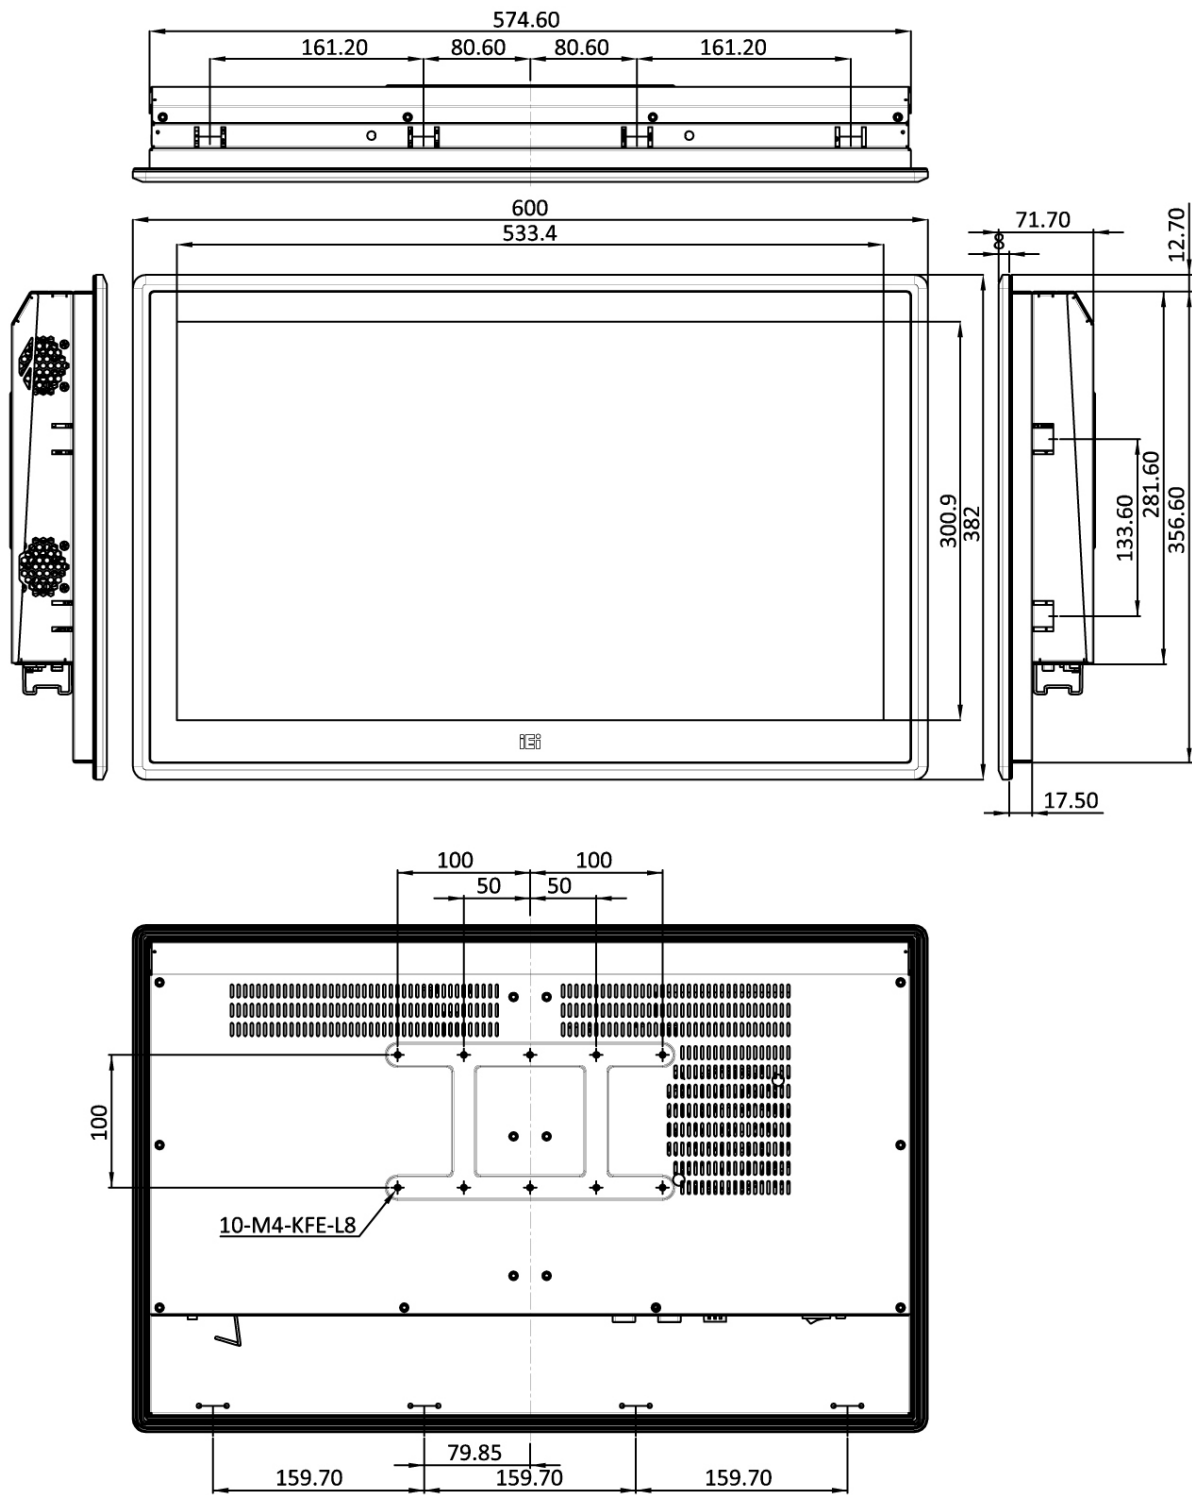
PPC-F24A-H81 Dimensions (mm)
